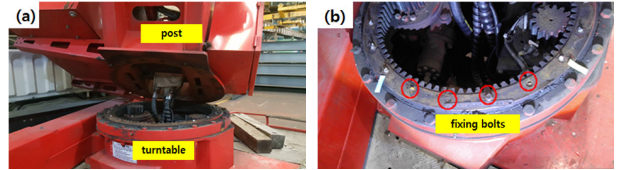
Failure scene of the fractured turntable fixing bolts: (a) the turntable and boom after accident, and (b) the fractured fixing bolts.
